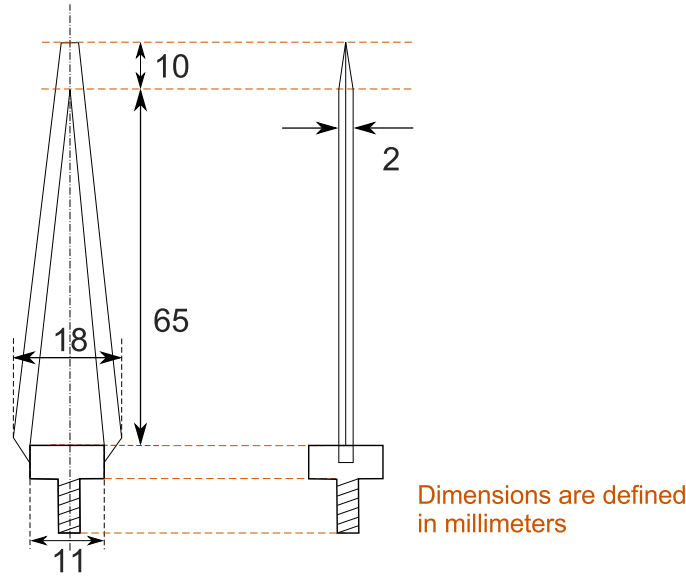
Dimensions of cutting knife involved in ultrasonic chamfering process
